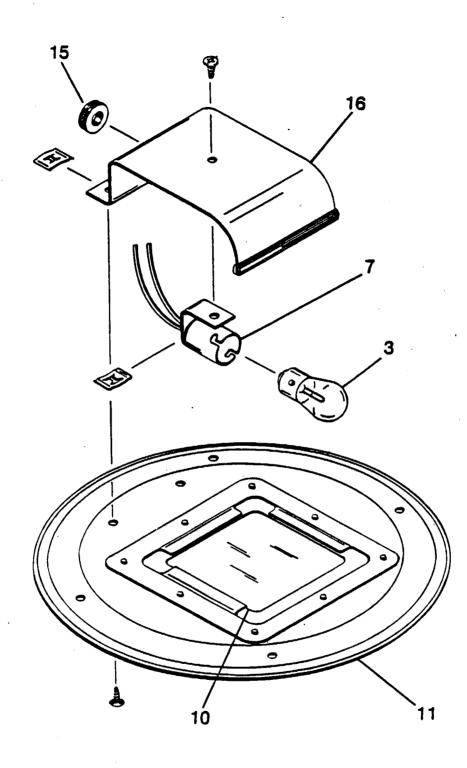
Instrument, Dome and Courtesy Light Installation (Sheet 1 of 2)
